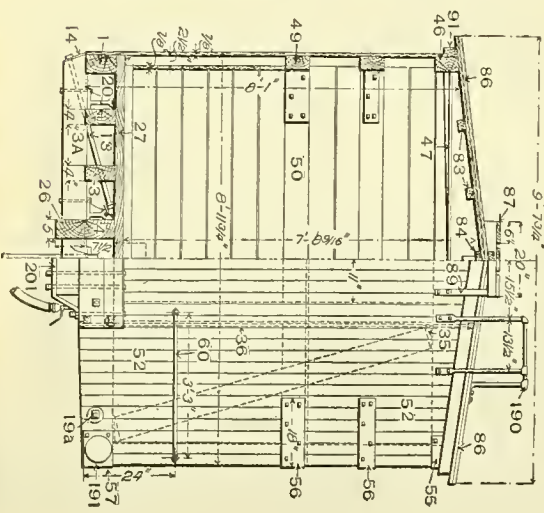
Half Plan of Underframe and Part Plan of Roof.
